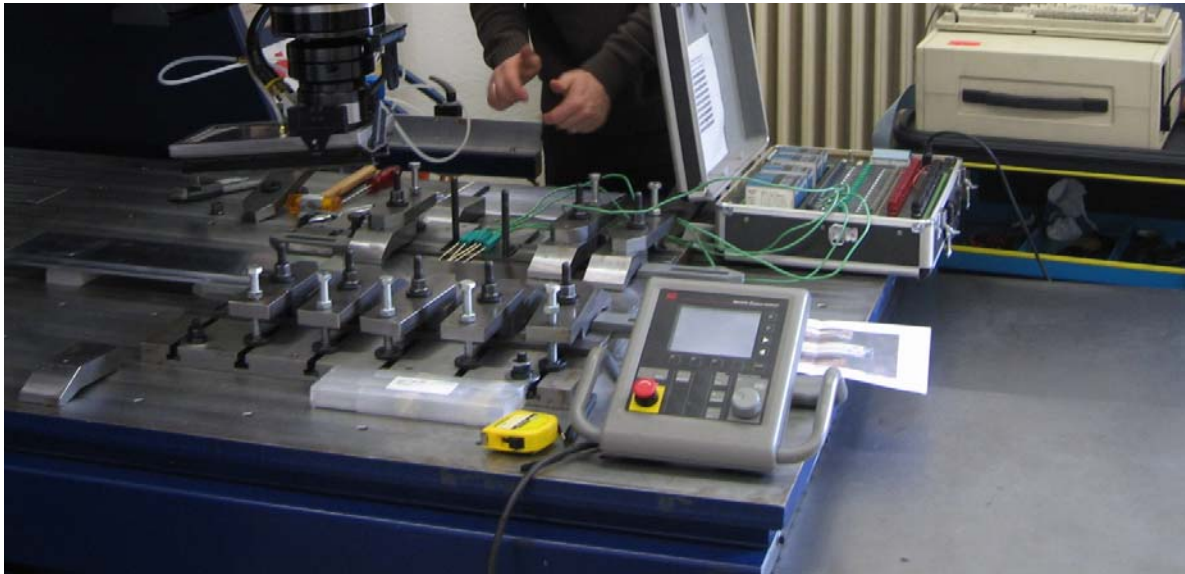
Typical weld setup with argon shielding mounted on the weld head
